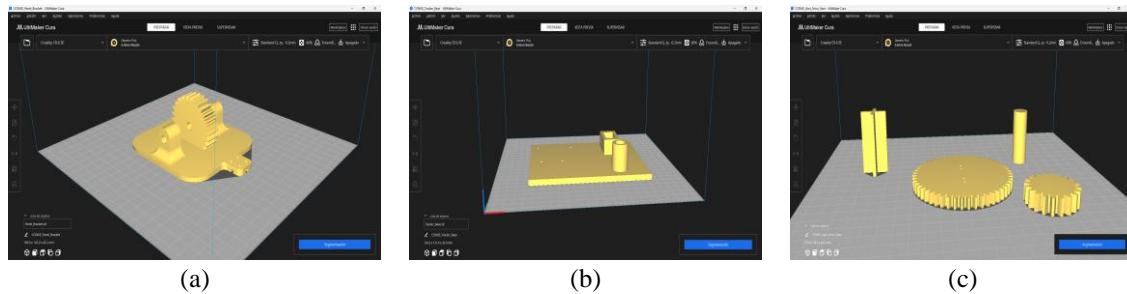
Parts of the mechanical structure; (a) vertical motion support, (b) motor support, and (c) gears for movement on two axes
